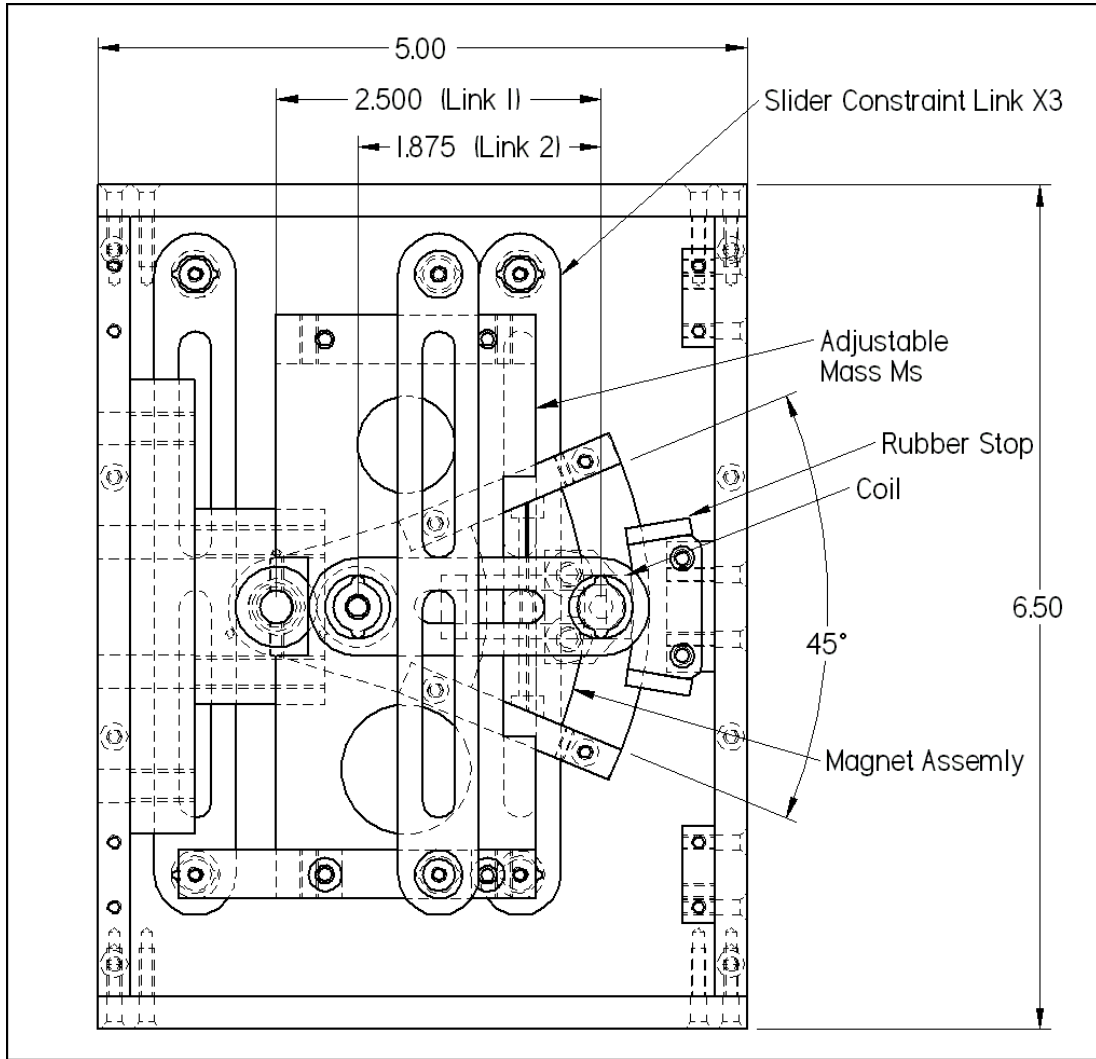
Side view of device showing coil assembly, linkage configuration, and slider constraints. All linear dimensions shown in inches.
